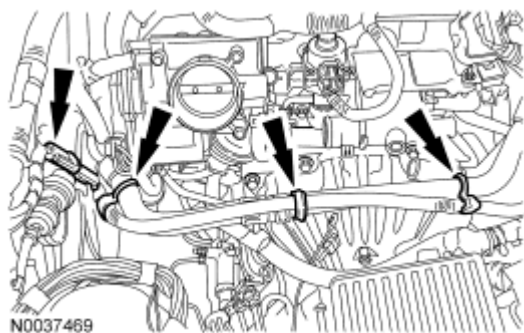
Locating Block Heater Electrical Connector Harness Retaining Clips
